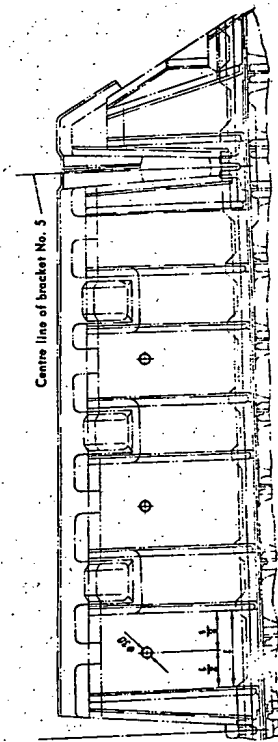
AILERON LEADING EDGE #17H HOLES FOR MAKING AILERON CONTROL "HEAVIER"
